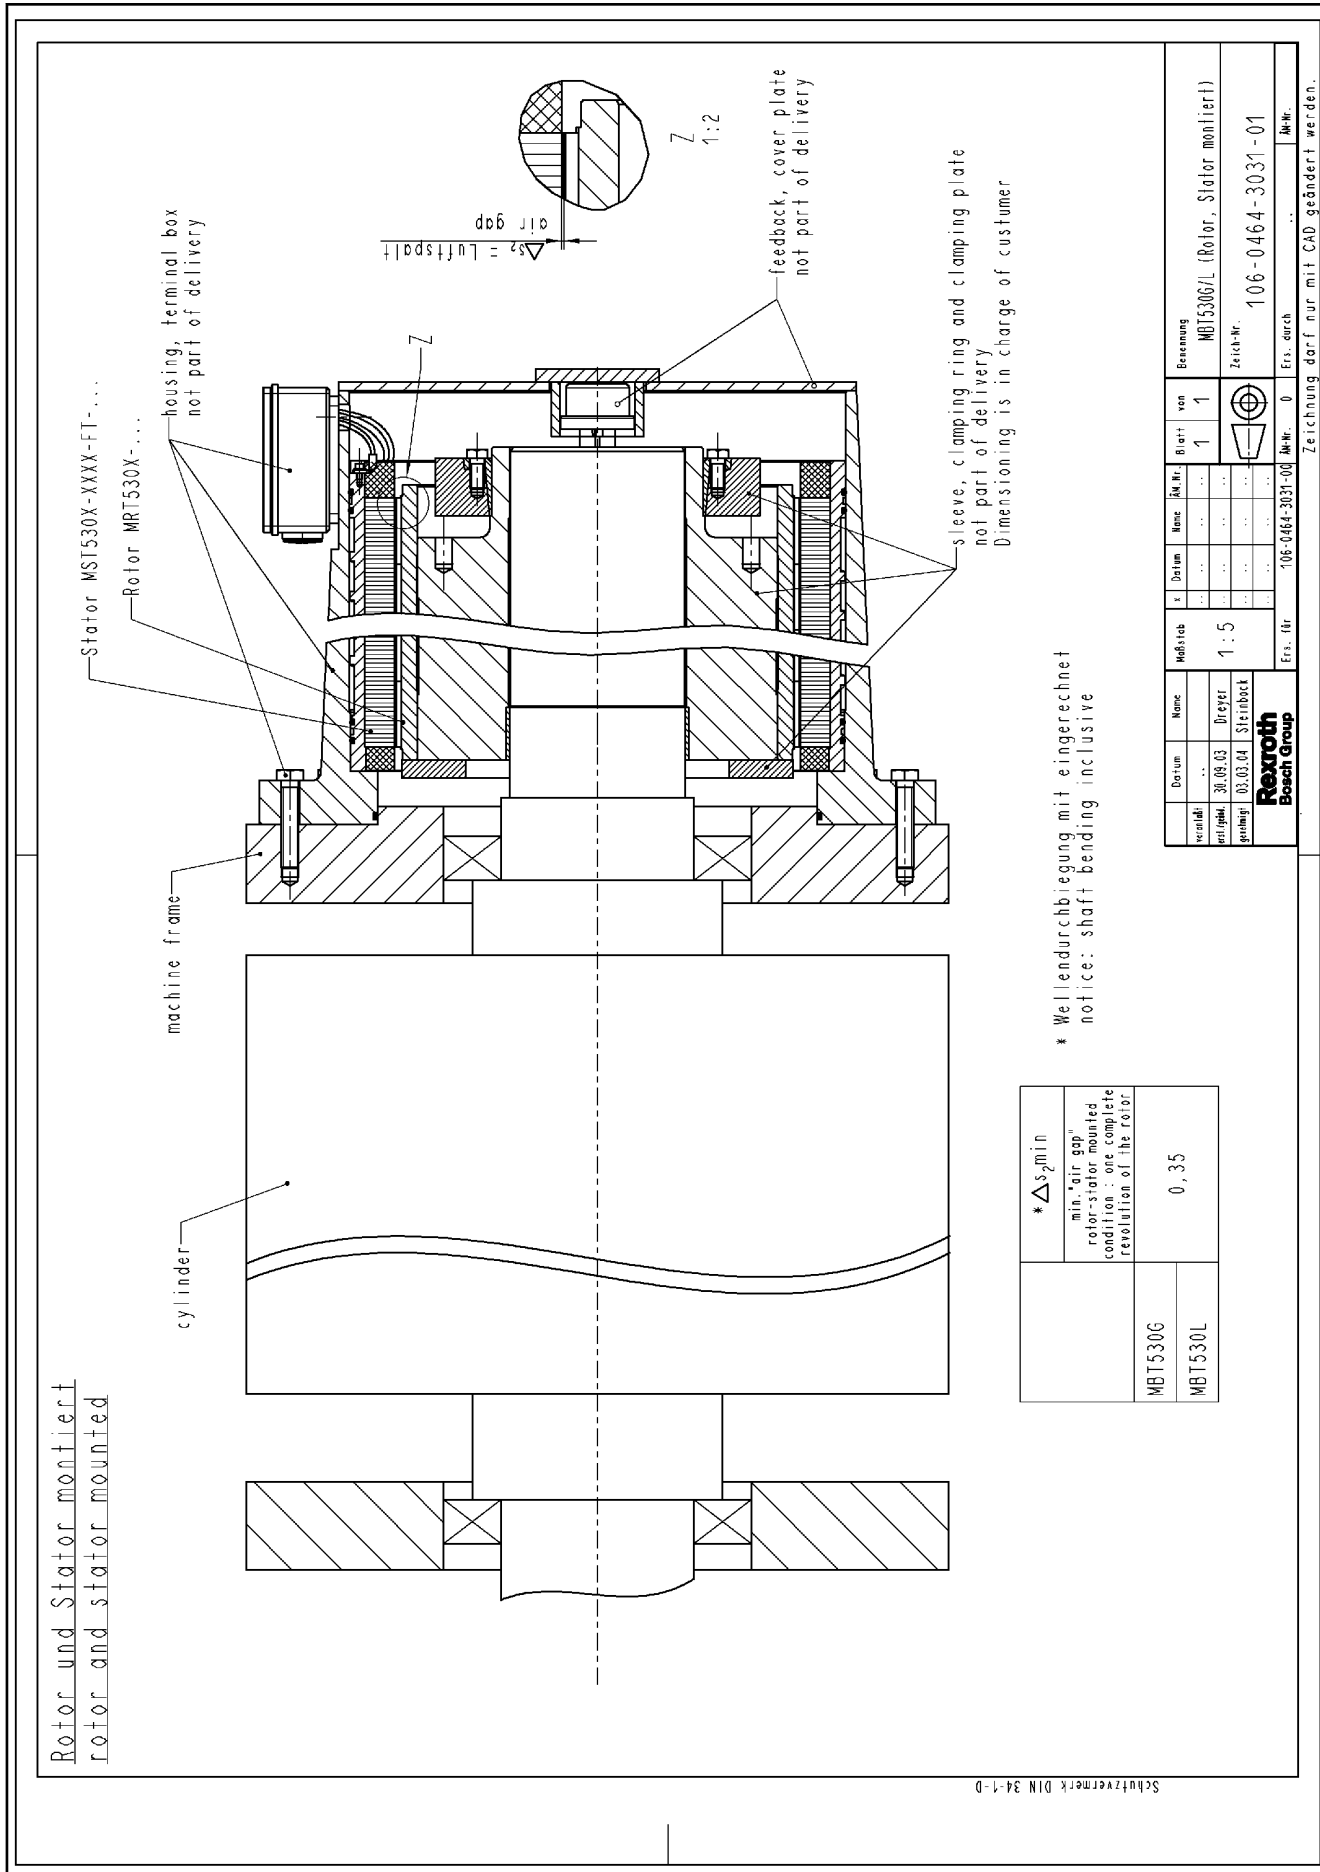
Dimension sheet for motor MBT530G, 530L - rotor and stator
